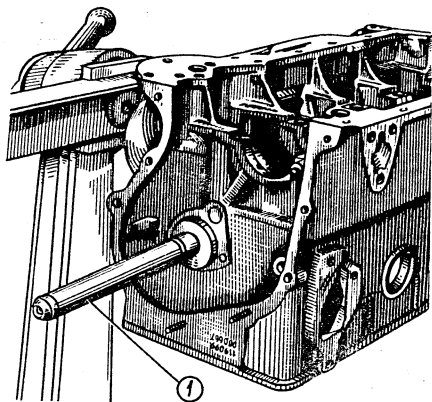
Removal and Installation of Oil Pump Drive Shaft Bushes:
